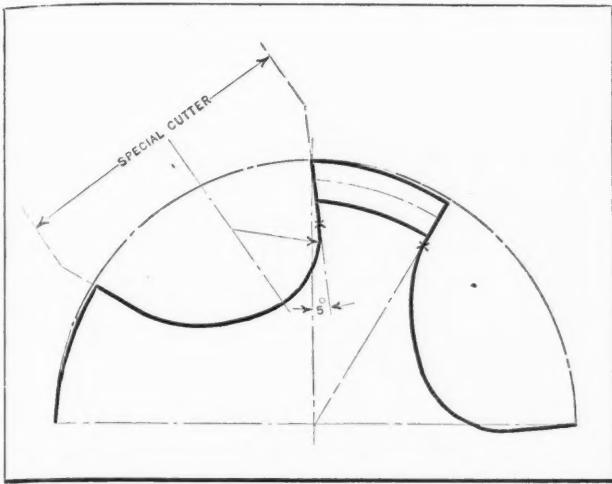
Tap with Four Flutes Milled with Special Cutter Producing 5-degree Constant, Positive Rake on the Cutting Edges
